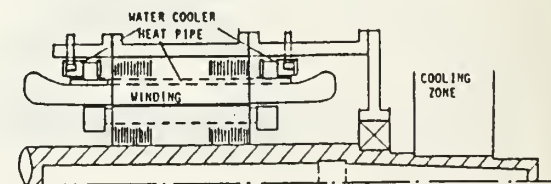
Longitudinal section of 150kW enclosed motor with heat pipes in stator slots and shaft
